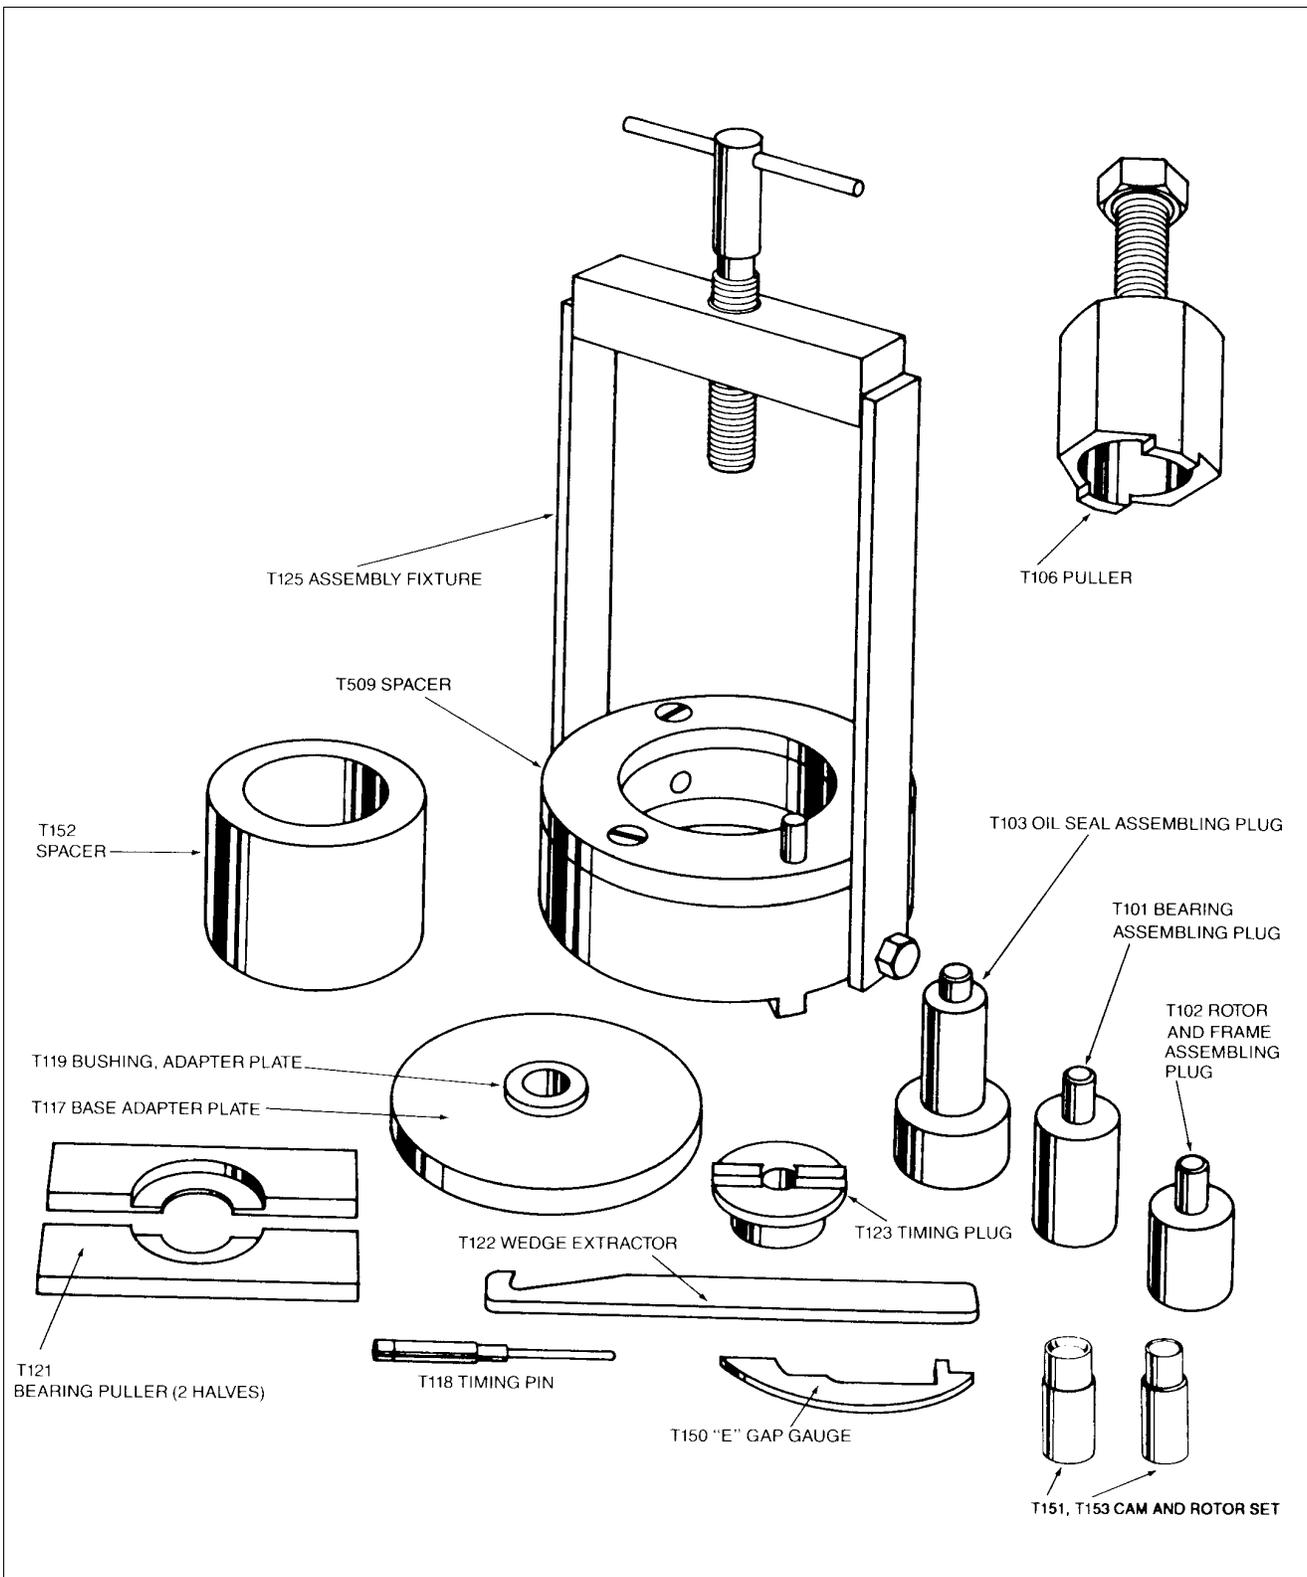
Slick T-100 Assembly and Timing Tool Kit
